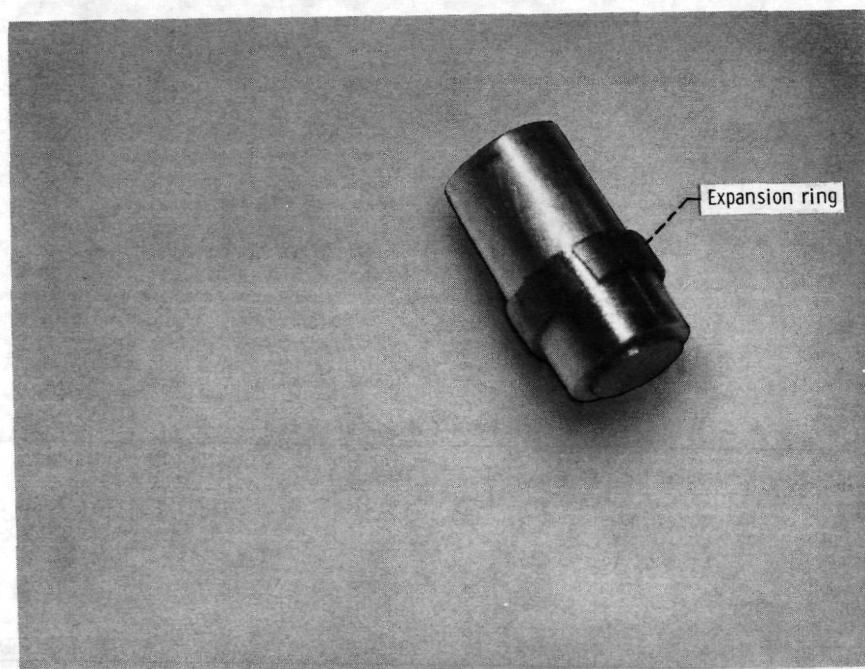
Hardware for T-111 expansion ring ductility test showing typical brittle fracture.
